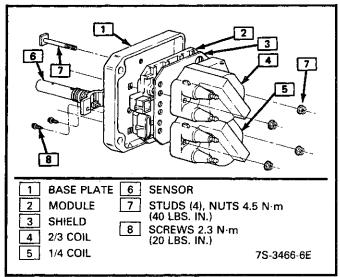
"DIS" Assembly Exploded View (2.5L)
